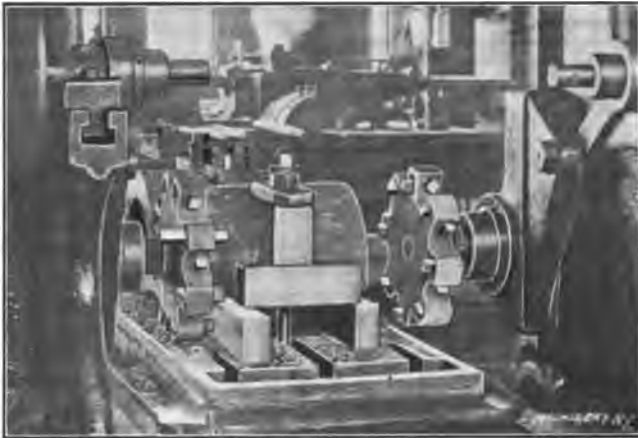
Enlarged View showing the Two Inserted Tooth Mills
